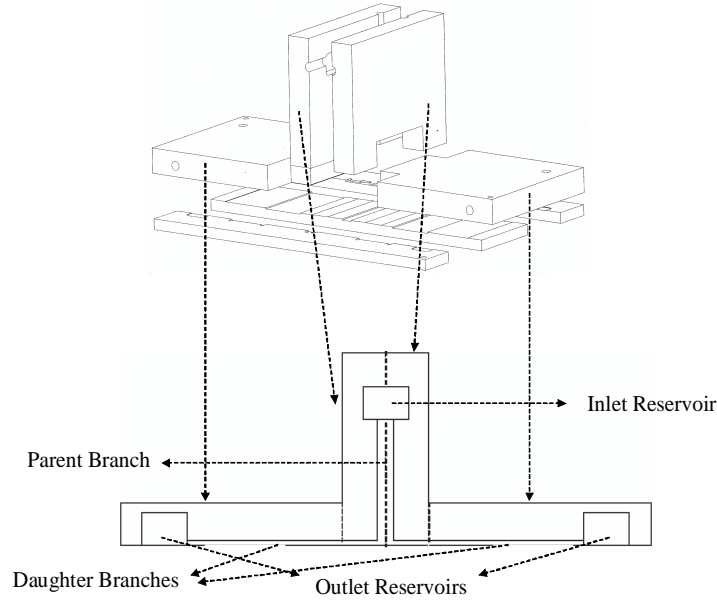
T-shaped flow chamber - side cutaway view of parts of constructed chamber.
